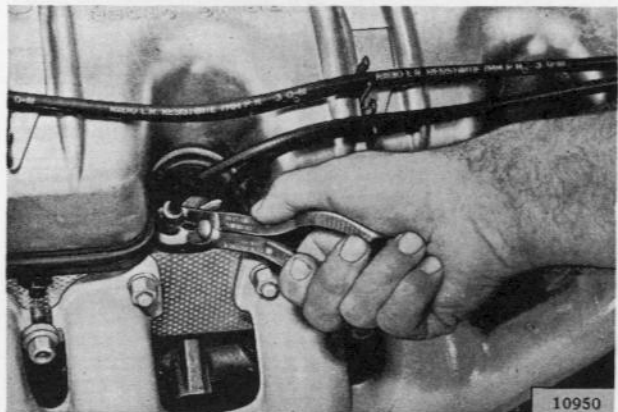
REMOVING SPARK PLUG WIRE CABLE WITH TOOL W-274
